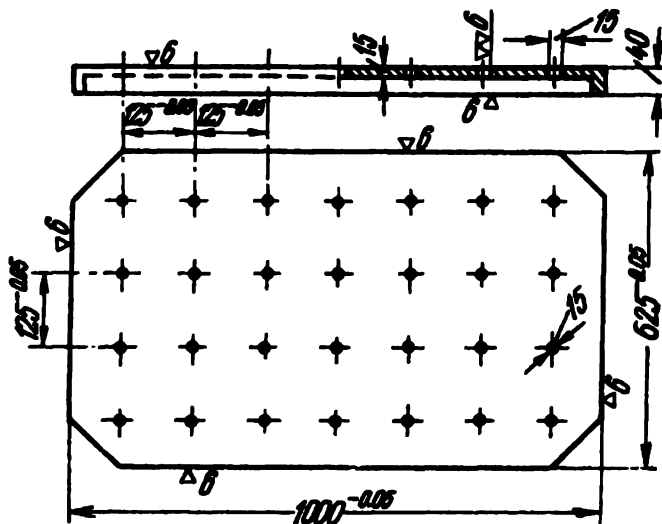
Cores are machine-moulded with the aid of universal core boxes (Fig. 79). The box is composed of replaceable parts, which allow the size and shape of the cores to be changed.
